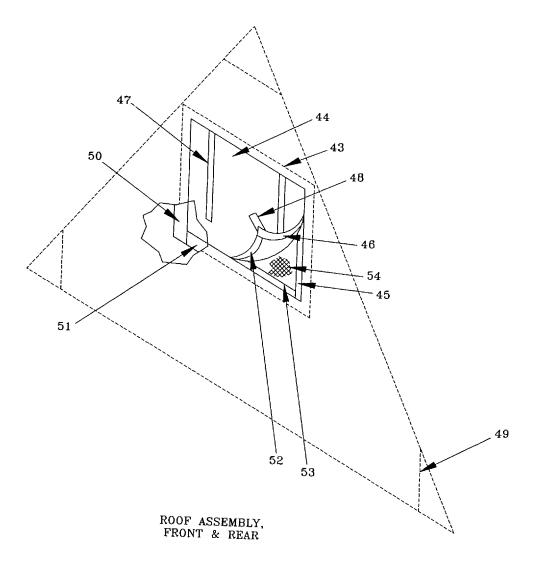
Tent Body Assembly (Sheet 3 of 7)
